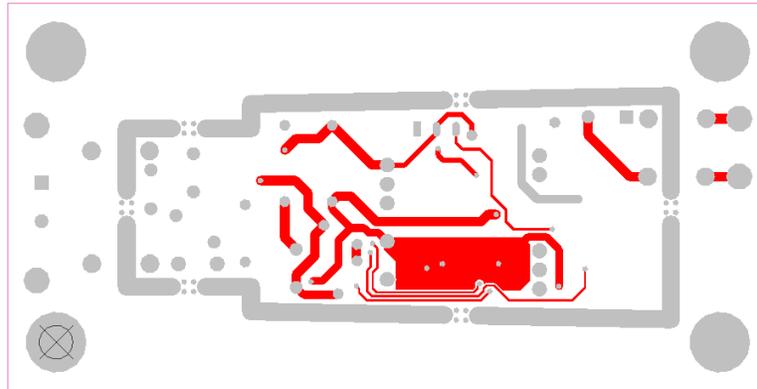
LM3447-PAR-230VEVM Top Layer Copper (top view)
